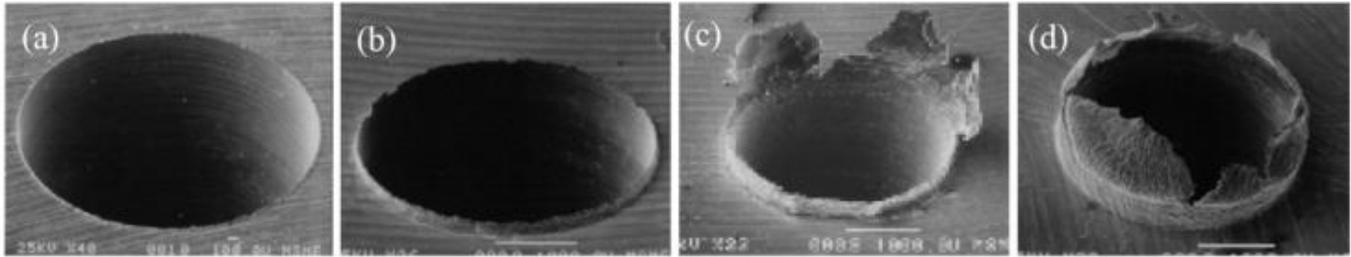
Types of burrs in micro drilling (a) virtually burr free (b) uniform burr, (c) transient burr, (d) crown burr [18]
